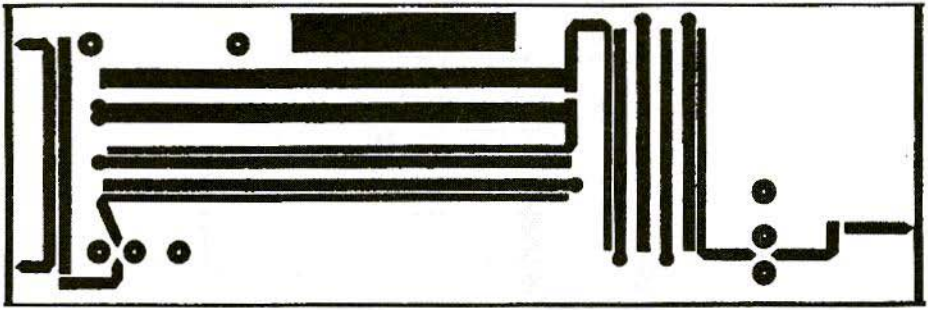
1270 MHz PSK Modulator PCB - actual size 120 x 40mm
